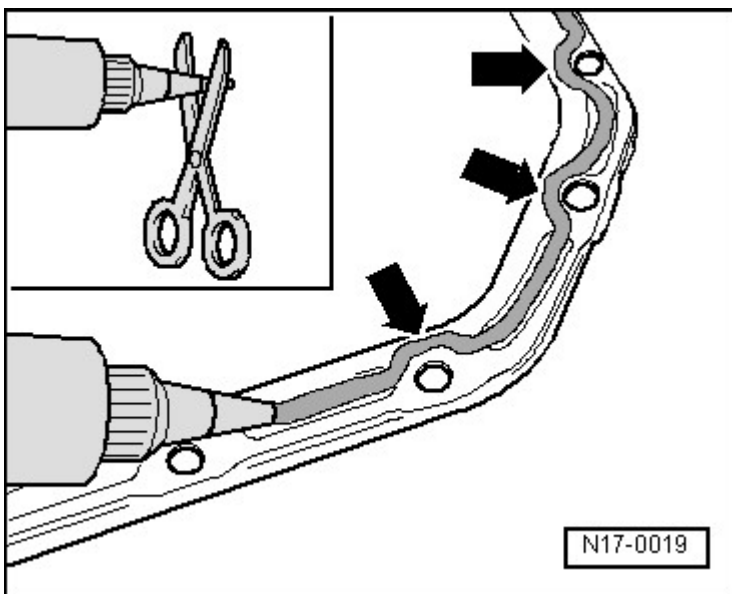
Cutting Off Tube Nozzle & Applying Silicone Sealing Compound To Oil Pan Sealing Surface
